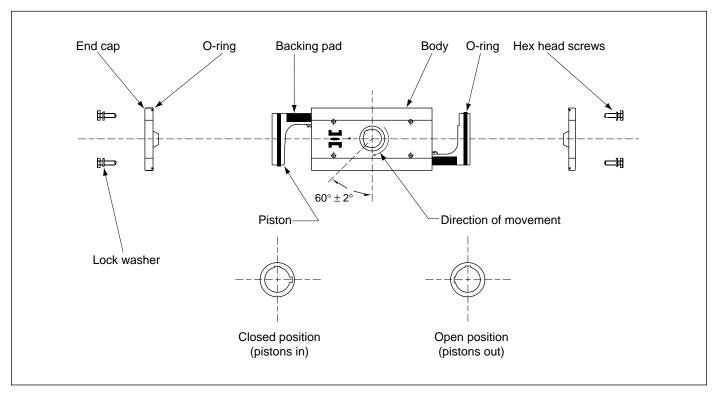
Top view of Standard Double Acting Actuator Assembly - Model 003-036
